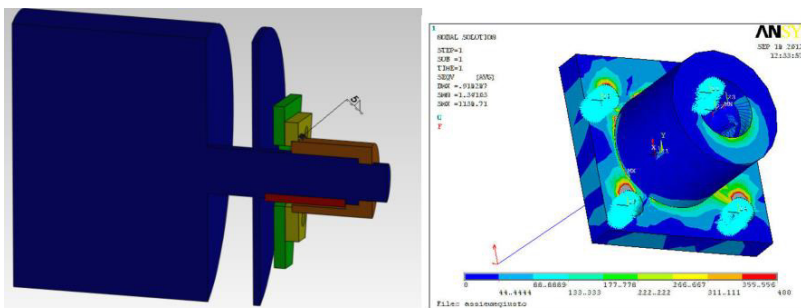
(a) Mounting plate design in SolidWorks®. Blue component represents the in-wheel motor. (b) Design verification in Ansys®. Sample results (frontal strain).
